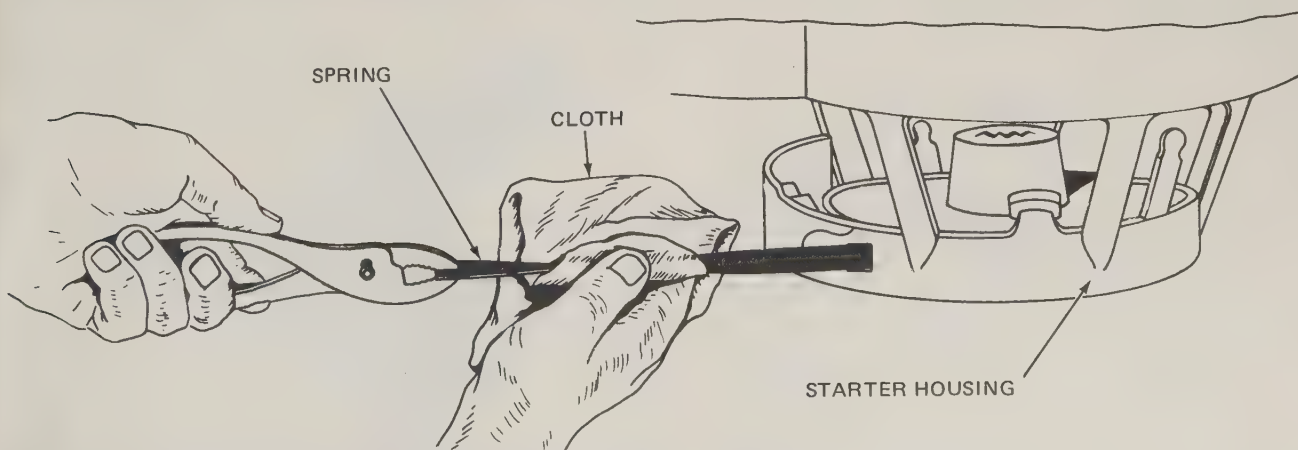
Use pliers and a cloth or a glove on your hand to pull the spring out of the starter housing.
